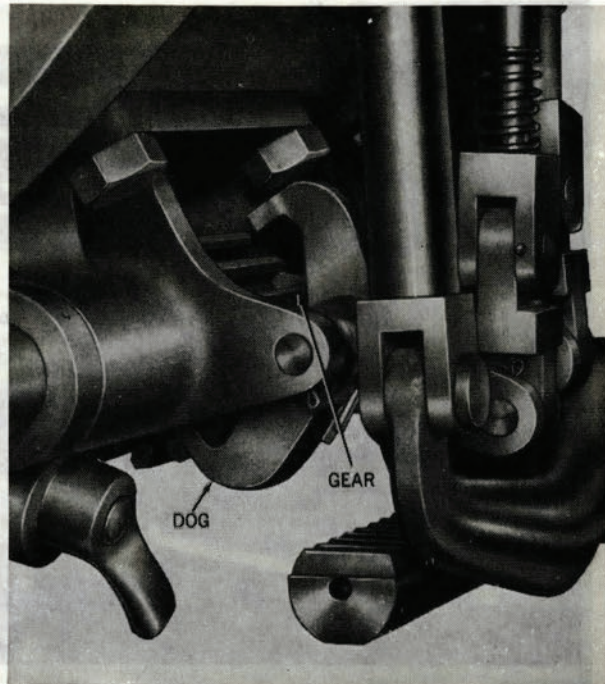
Position of Dog on Hand Operating Shaft—Drain Valve and Muzzle Door Interlock Lever at MUZZLE DOOR CLOSED.
